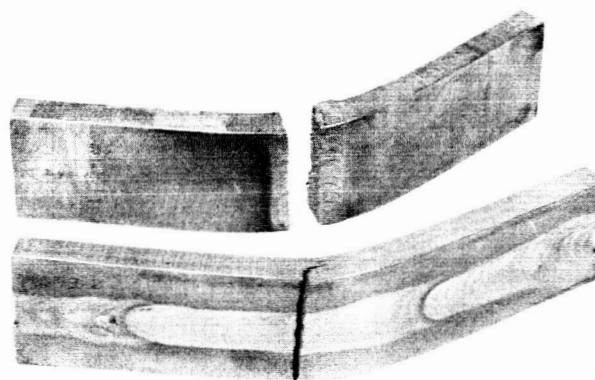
Cb-752 and C-129Y Plate Weld Bend Specimens
